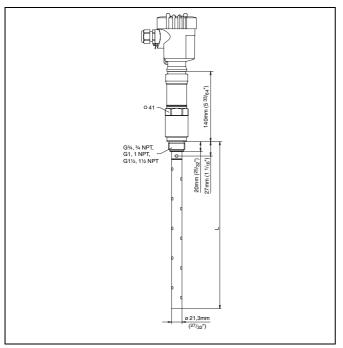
VEGAFLEX 66 (-20° ... +250°C) - coax version with thread
